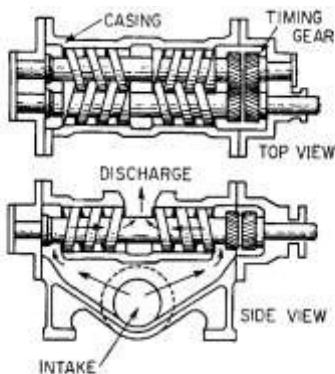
Two-rotor Screw Hydraulic Pump With Helical Gears
